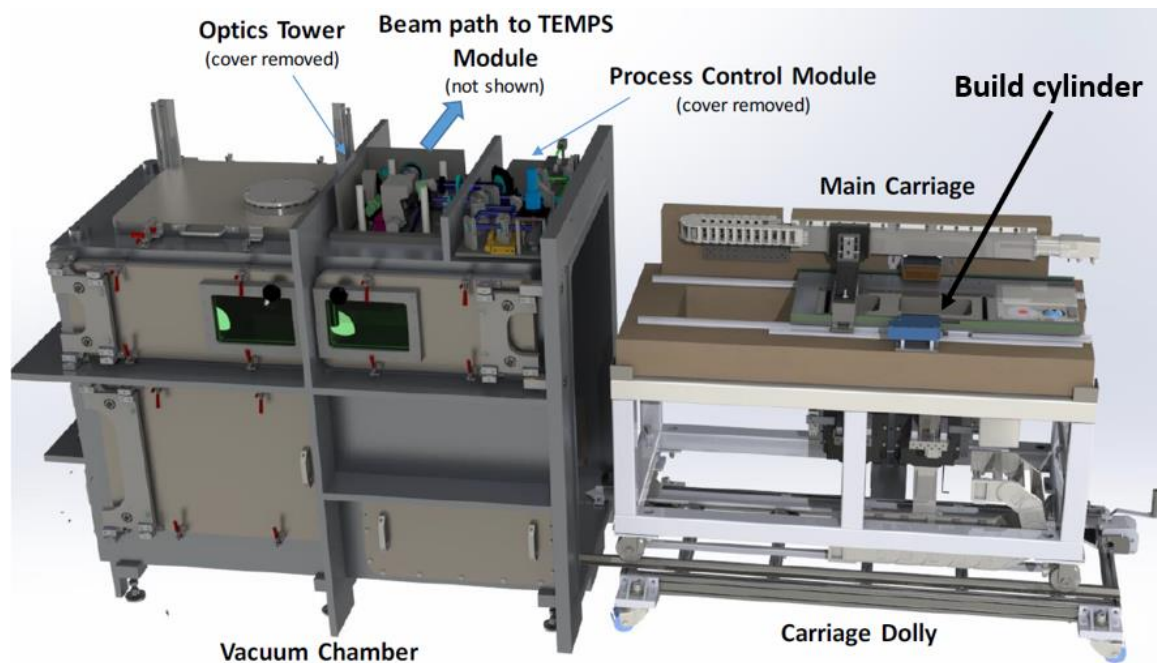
Solid model assembly of the AMMT with the main carriage removed from the vacuum chamber to show build cylinder location (B Lane et al. 2016).
